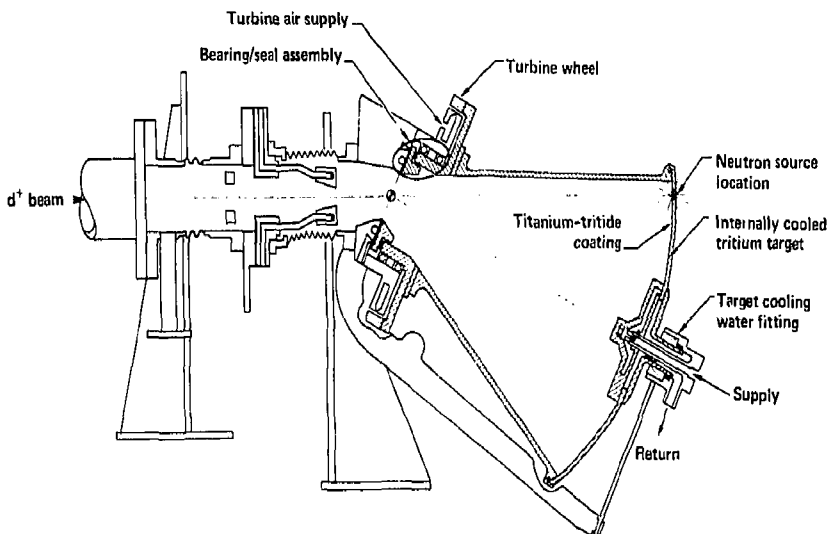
A schematic drawing of the rotating target assembly. The shaded parts rotate at  $\sim 4000$  rpm during operation.
